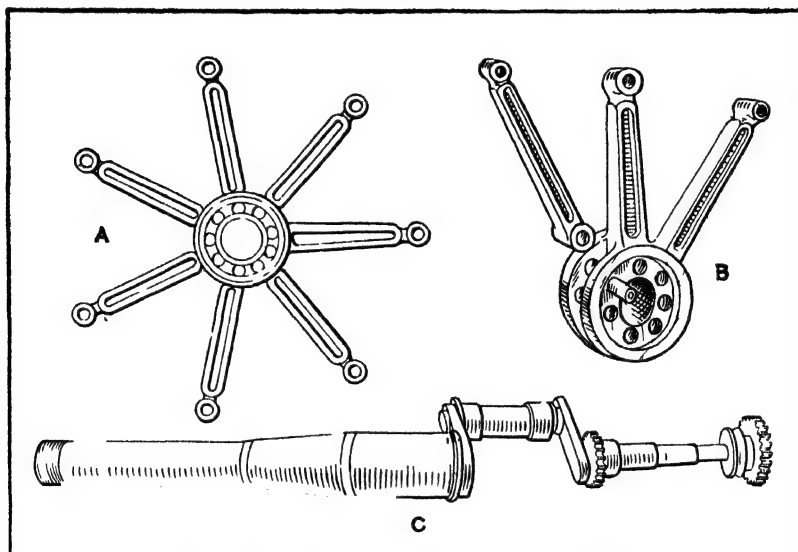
Connecting Rod and Crankshaft Construction of Early Gnome "Monosoupape" Engine.
